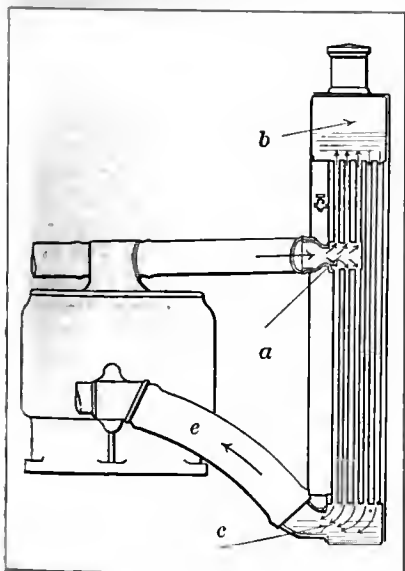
McCord type of thermo-siphon radiator, as used on Regal automobiles, showing a pocket for the steam to distribute in
